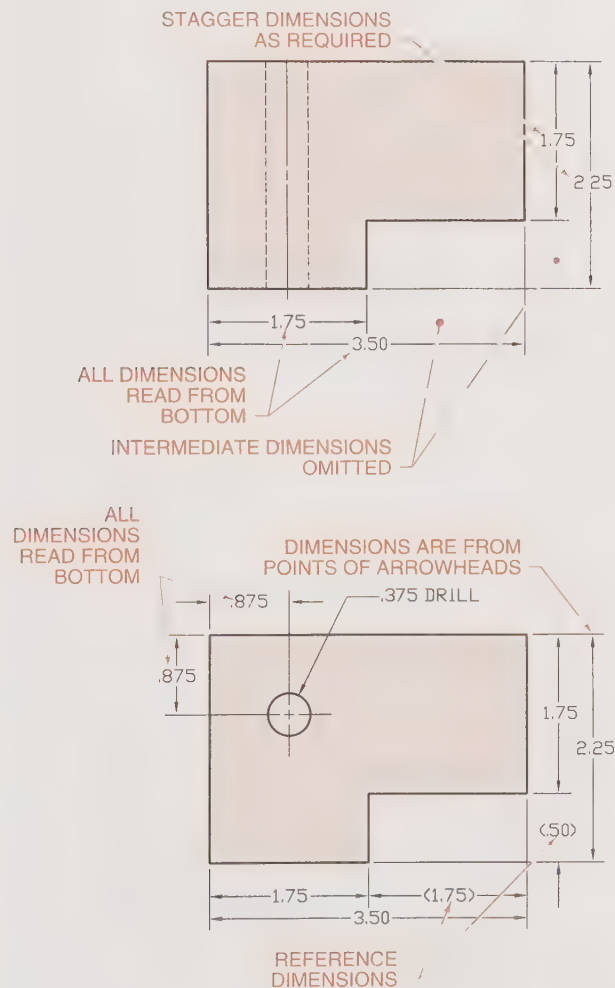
Dimensions and notes read from the bottom of the sheet.
